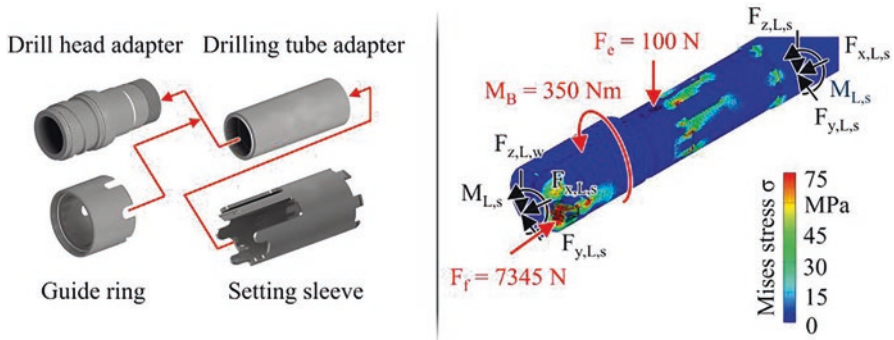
Left: Mechanical components of the compensation unit; Right: Static load FE-analysis of the compensation unit with contact to the workpiece bore wall under process loads
